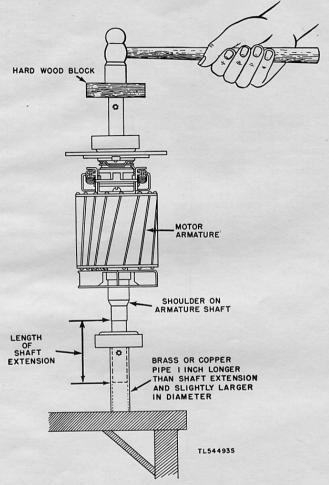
Mounting bearings on the armature shaft by use of hammer and soft metal pipe.
